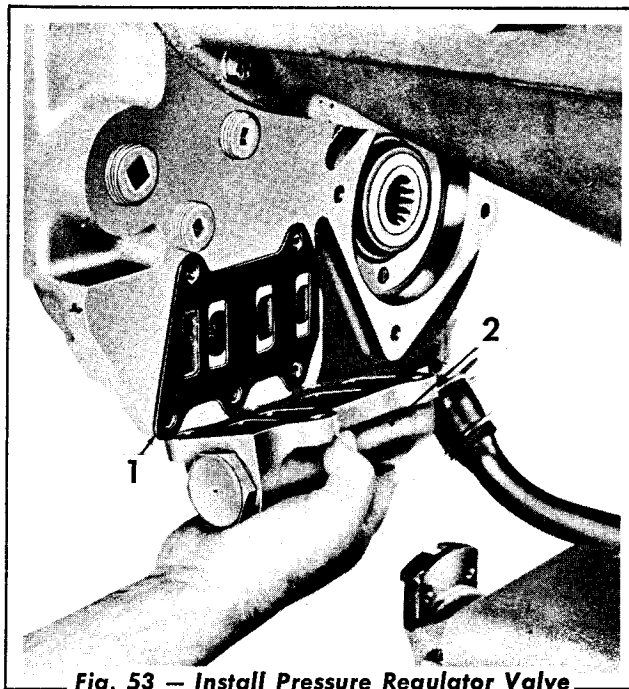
Install Pressure Regulator Valve Body Assembly
